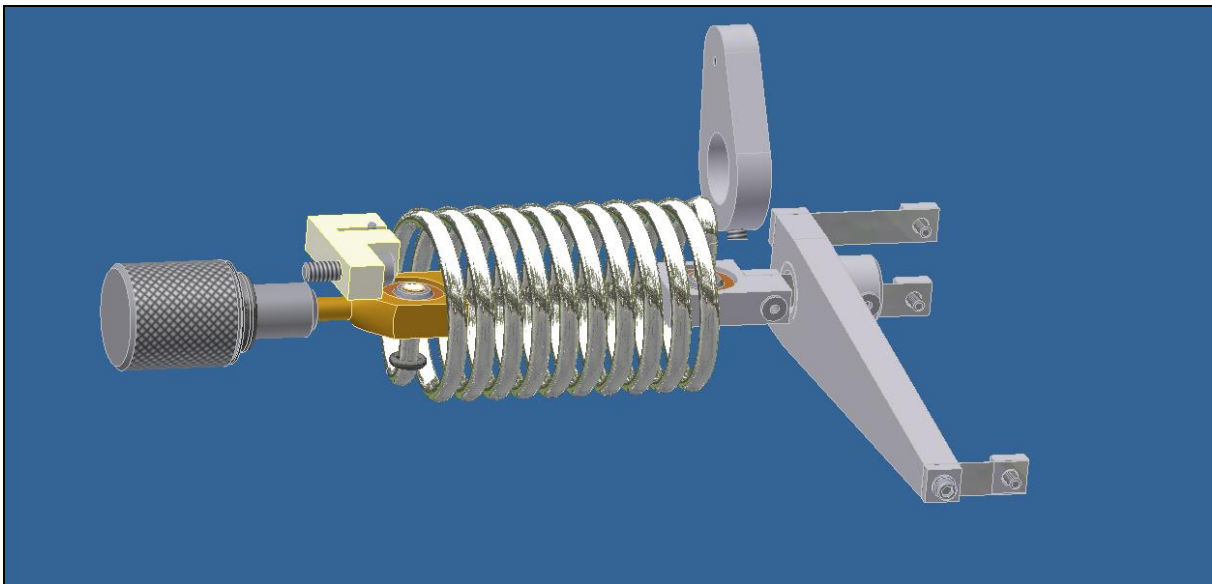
Spring Assembly Parts: Difference between GS-13LV and GS-13LH.
